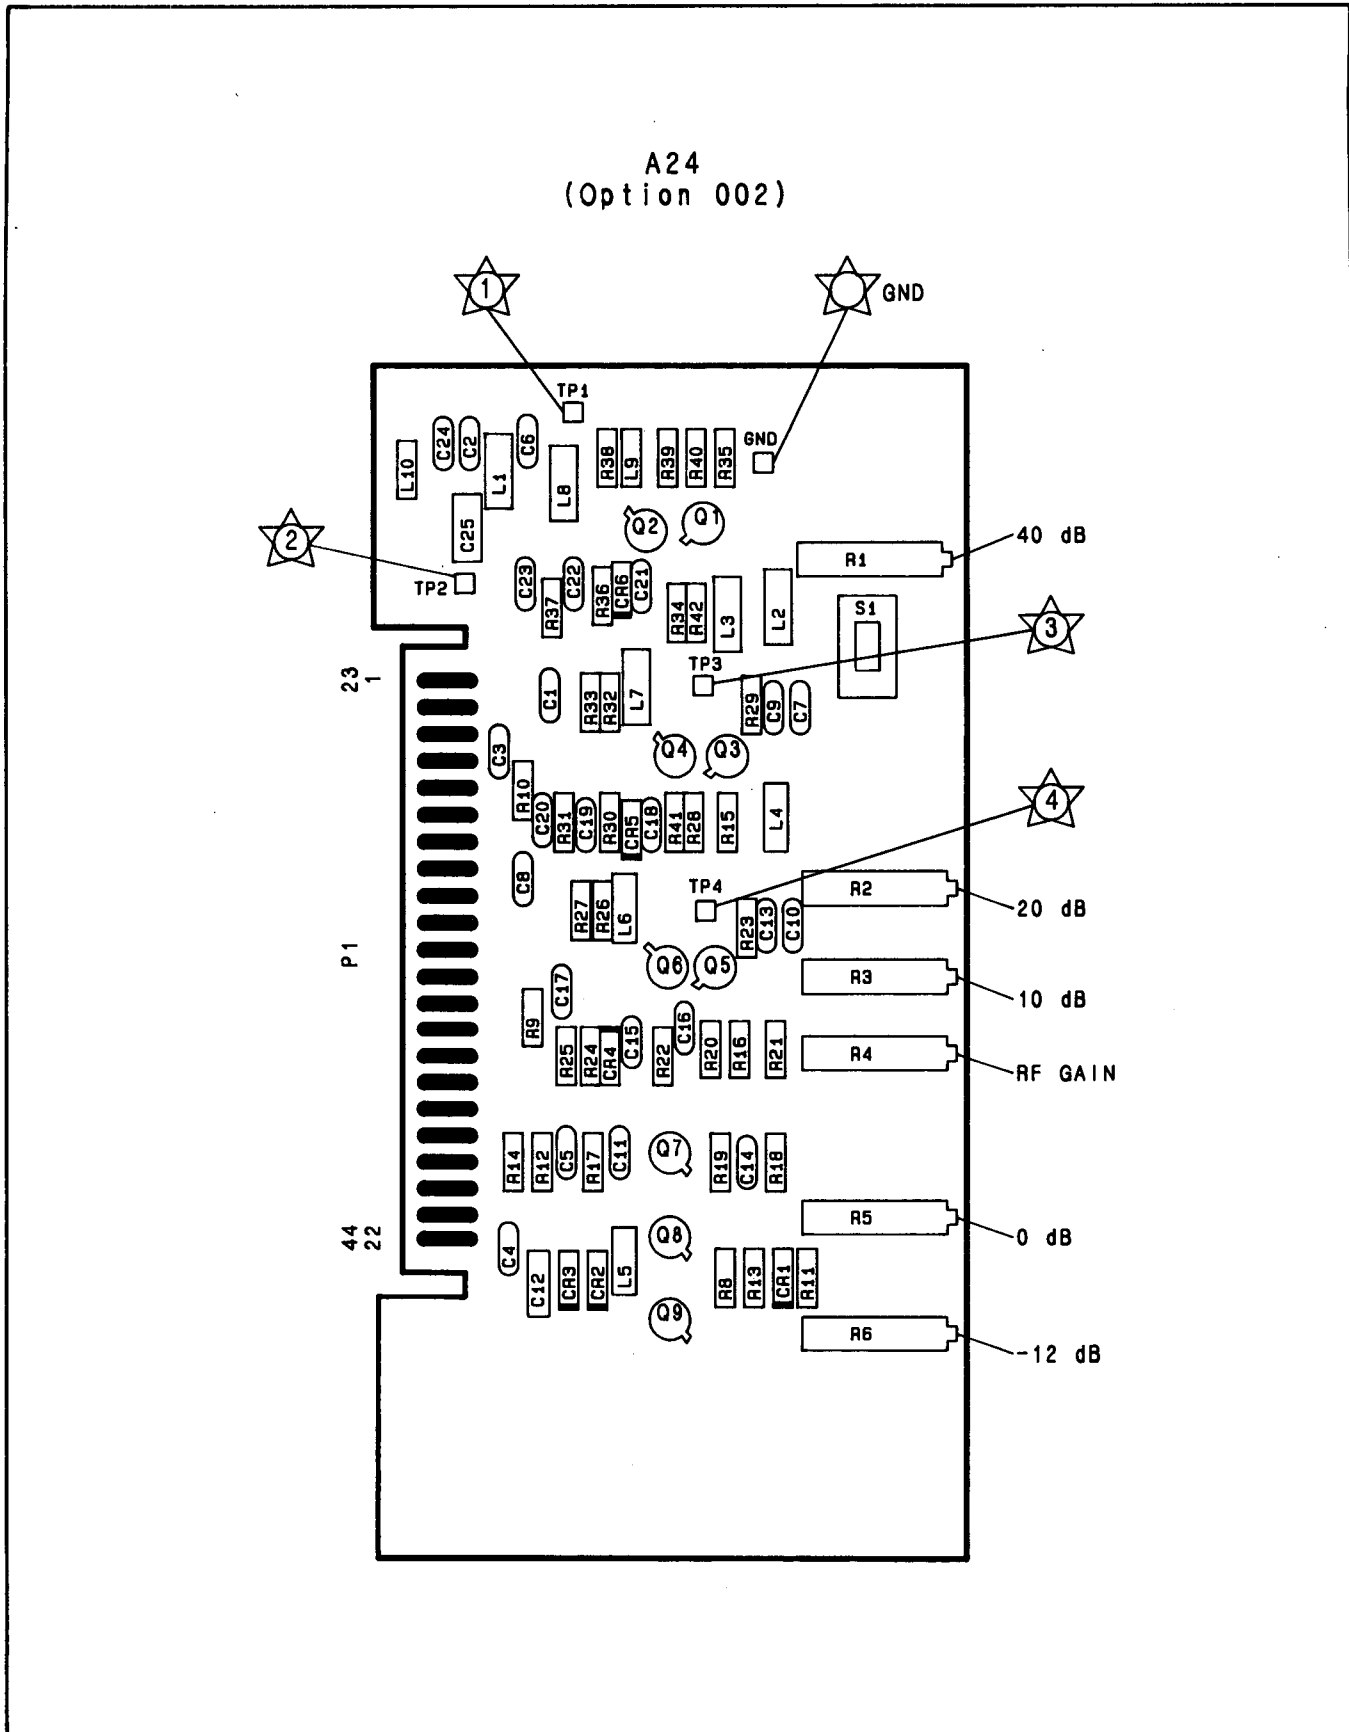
A24 Step Gain Amplifier Assembly (Option 002), Component Locations
